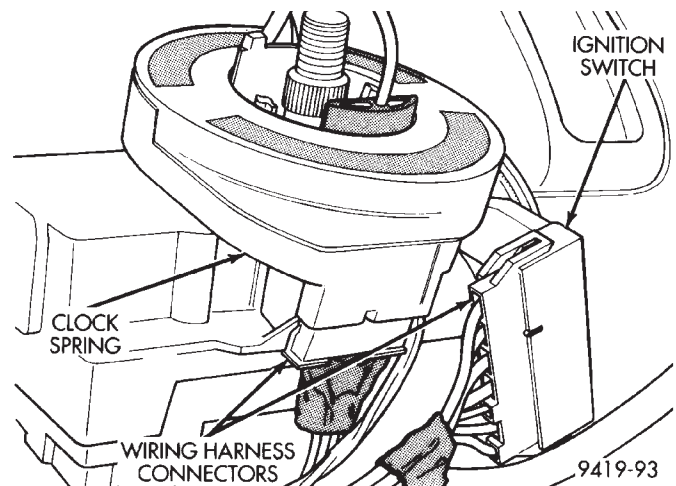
Clock Spring And Ignition Switch Wiring Connections
